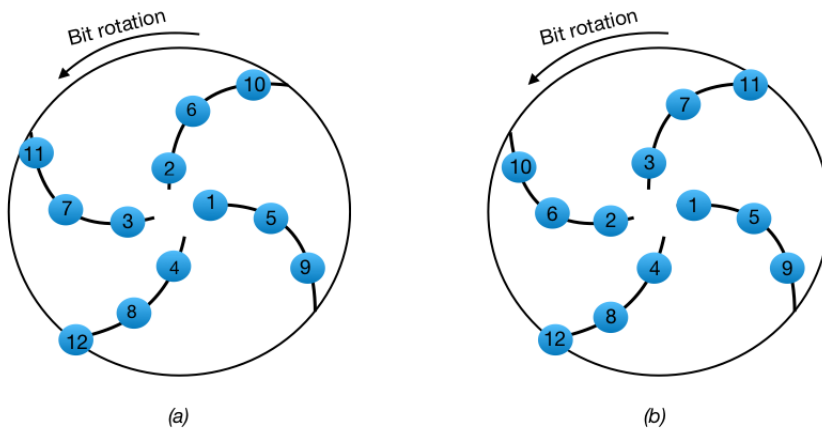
(a) Traditional cutter layout. (b) New cutter layout.
